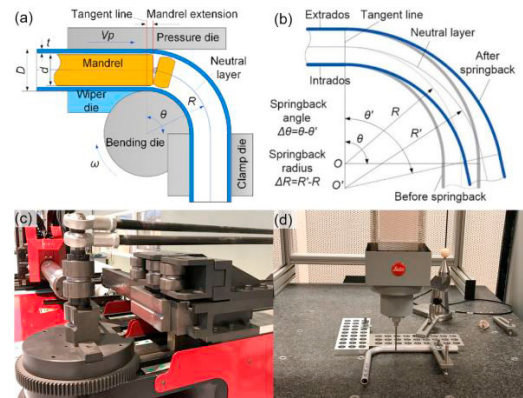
Rotary draw bending of tube and springback measurement: (a) tube bending principle; (b) schematic of unloading springback; (c) bending machine and tooling; (d) CMM for springback measurement.
